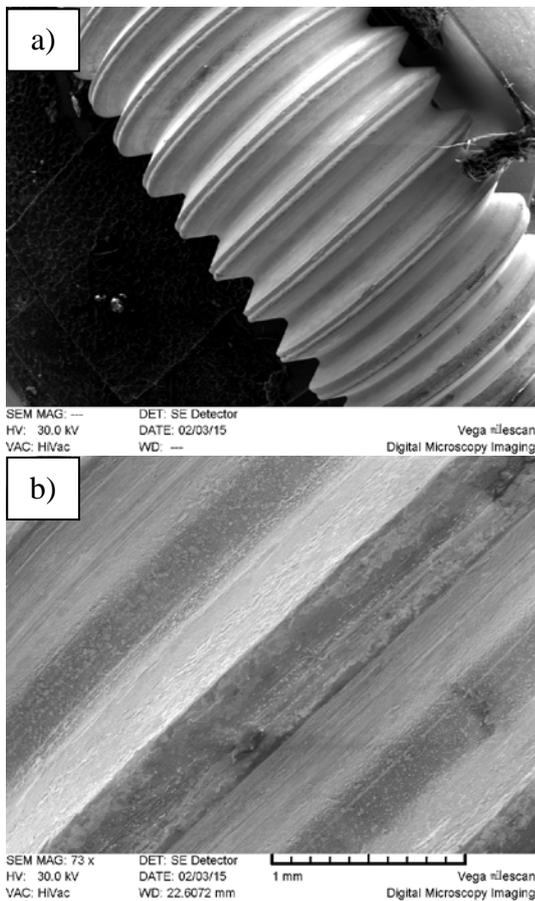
Microstructure of untreated bolt a) thread of untreated bolt; b) surface of thread
